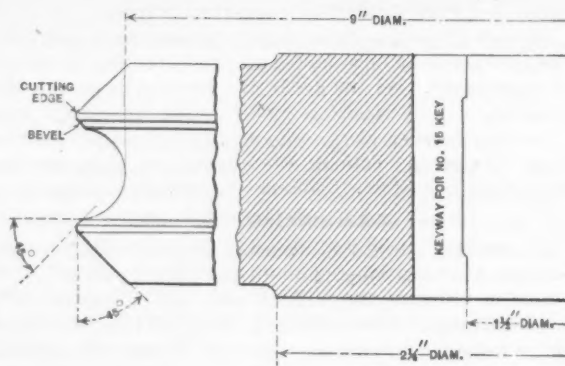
Section of a Single Groove Forming and Trimming Roll.
